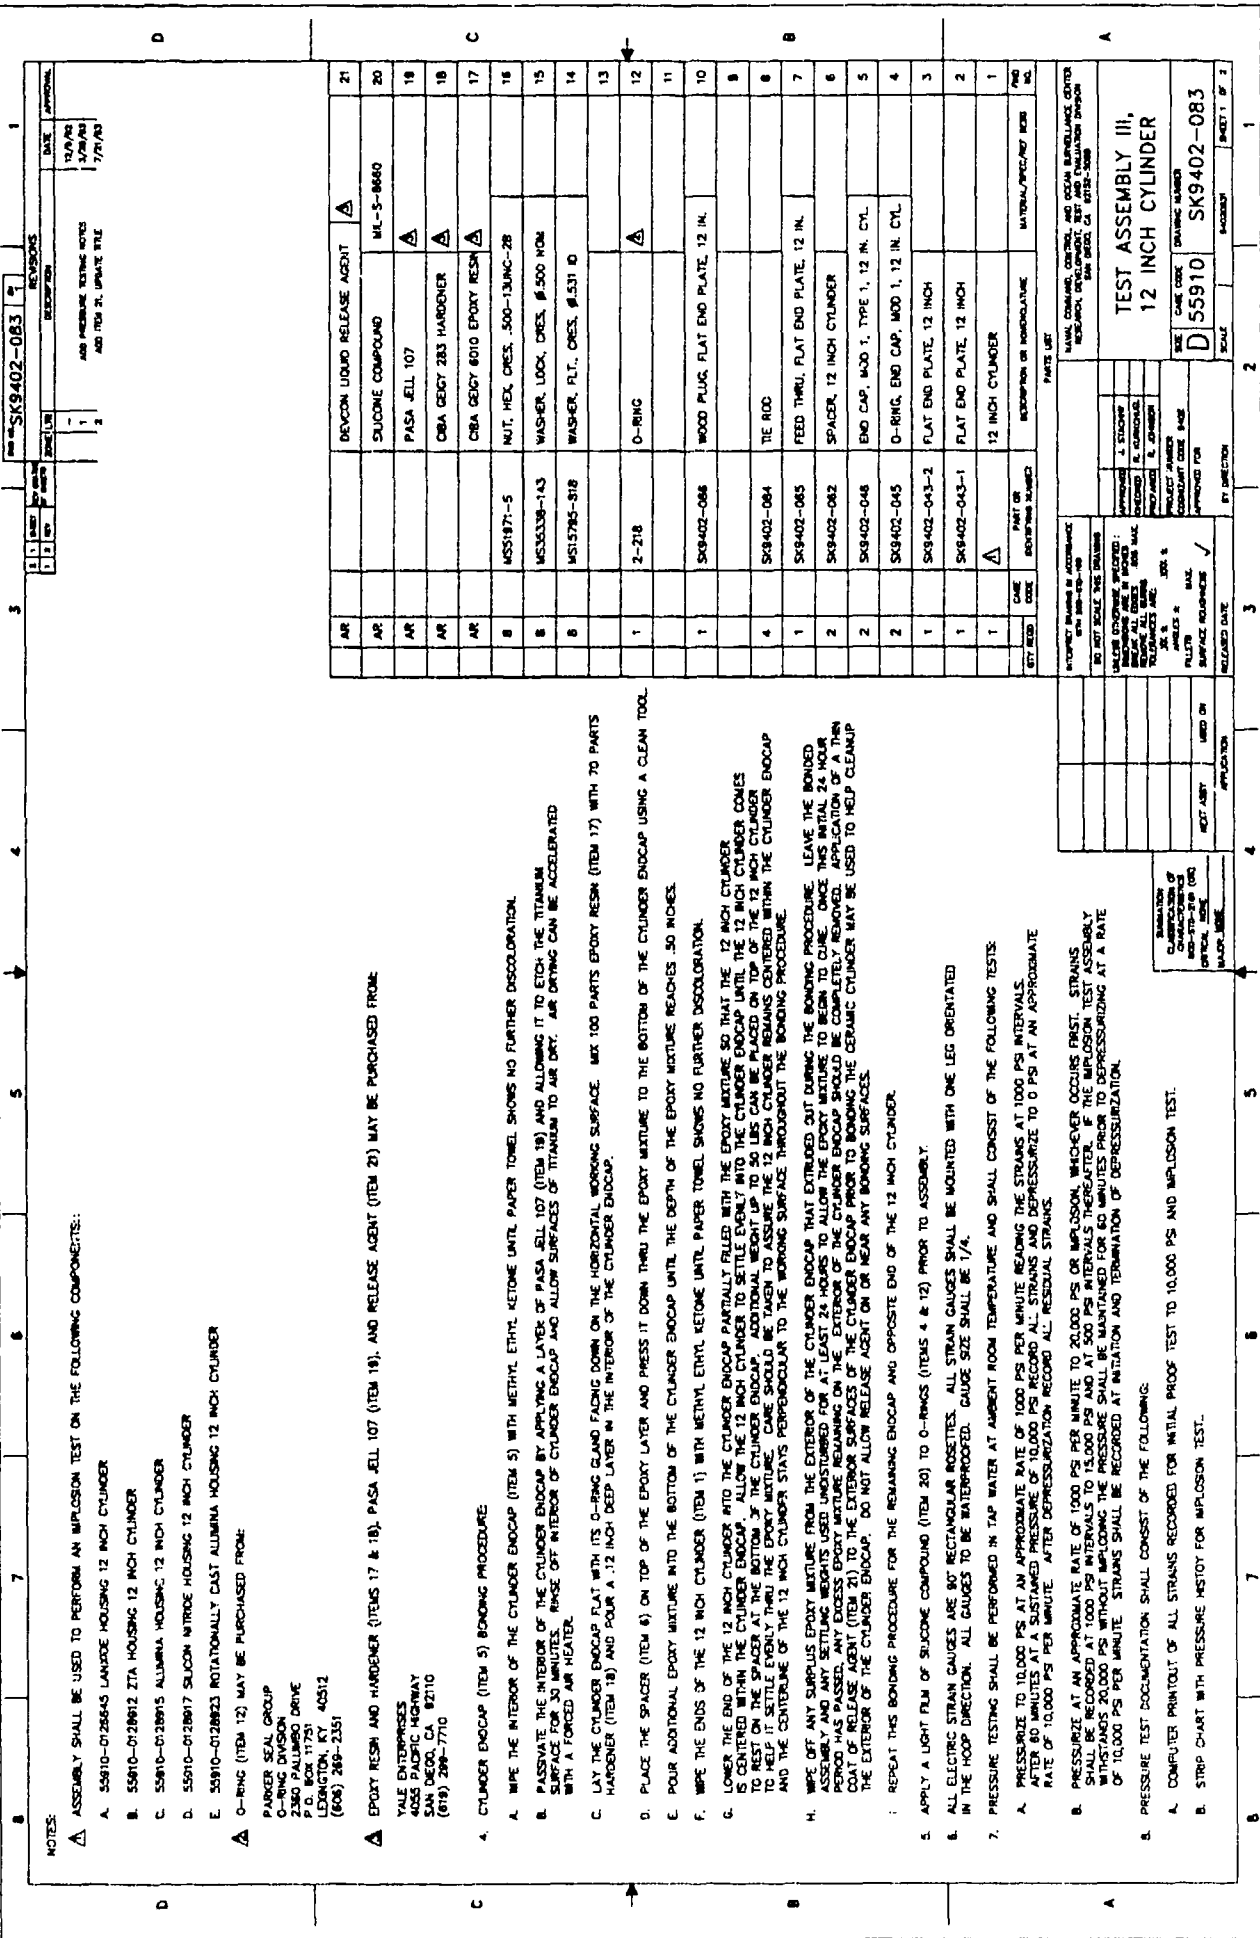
12-inch cylinder test assembly III configuration, Sheet 1.
